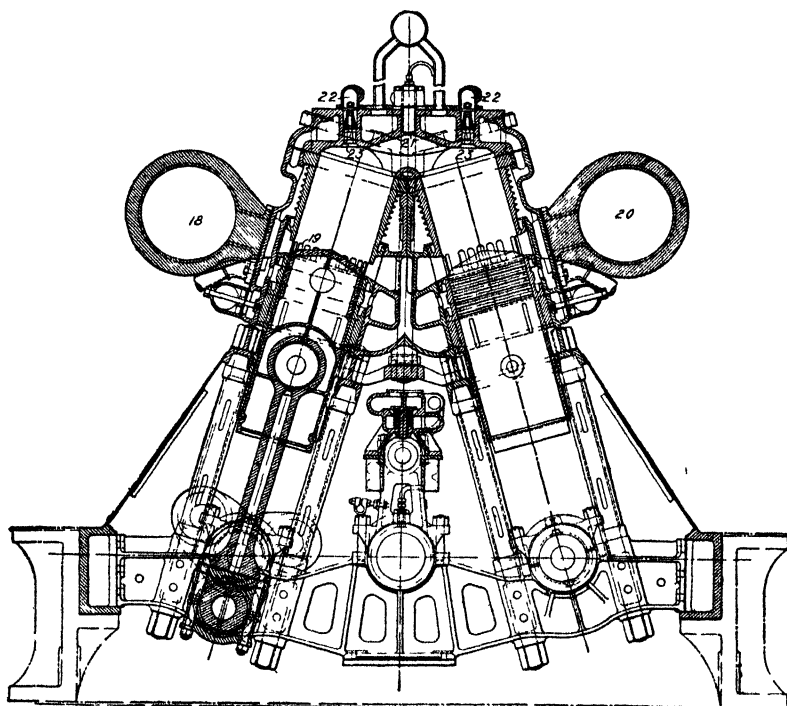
Cross-Section of 1,000 H.P. Baldwin-Knudsen Diesel Engine
